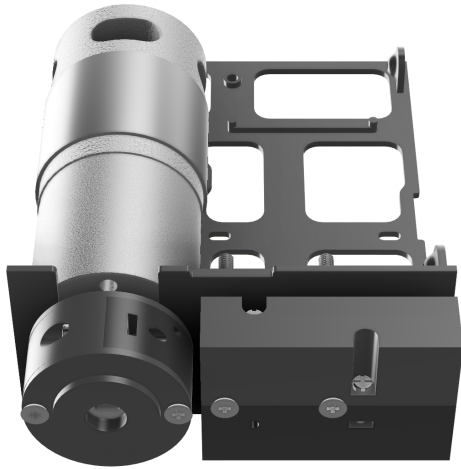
Assembled control box, with the actuation wheel enclosed in a casing. Raspberry Pi and motor driver are not pictured
